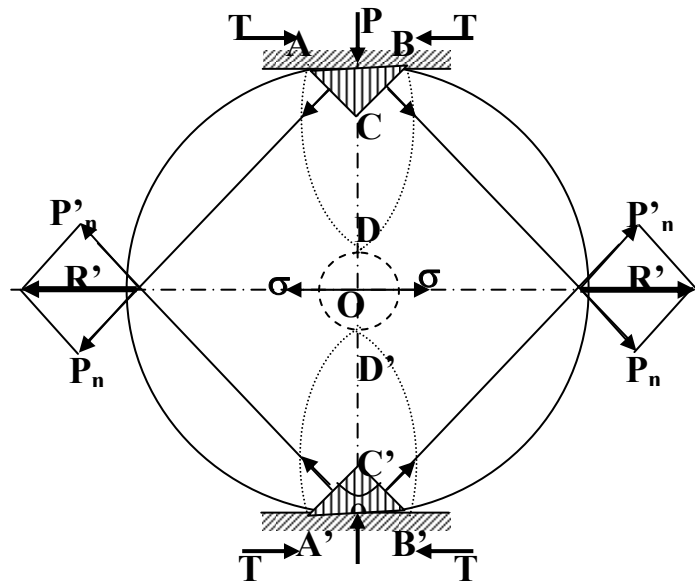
Scheme and the tension forces during forging blanks between tools round flat
